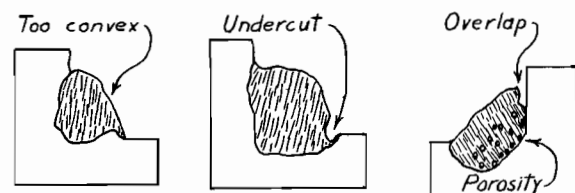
shows examples of poor welding and can be used as examples in the determination of weldability of the parent metal and filler rod.
